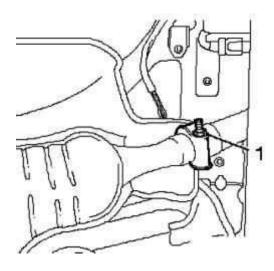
Mounting rear muffler clamp: 1 - nut
